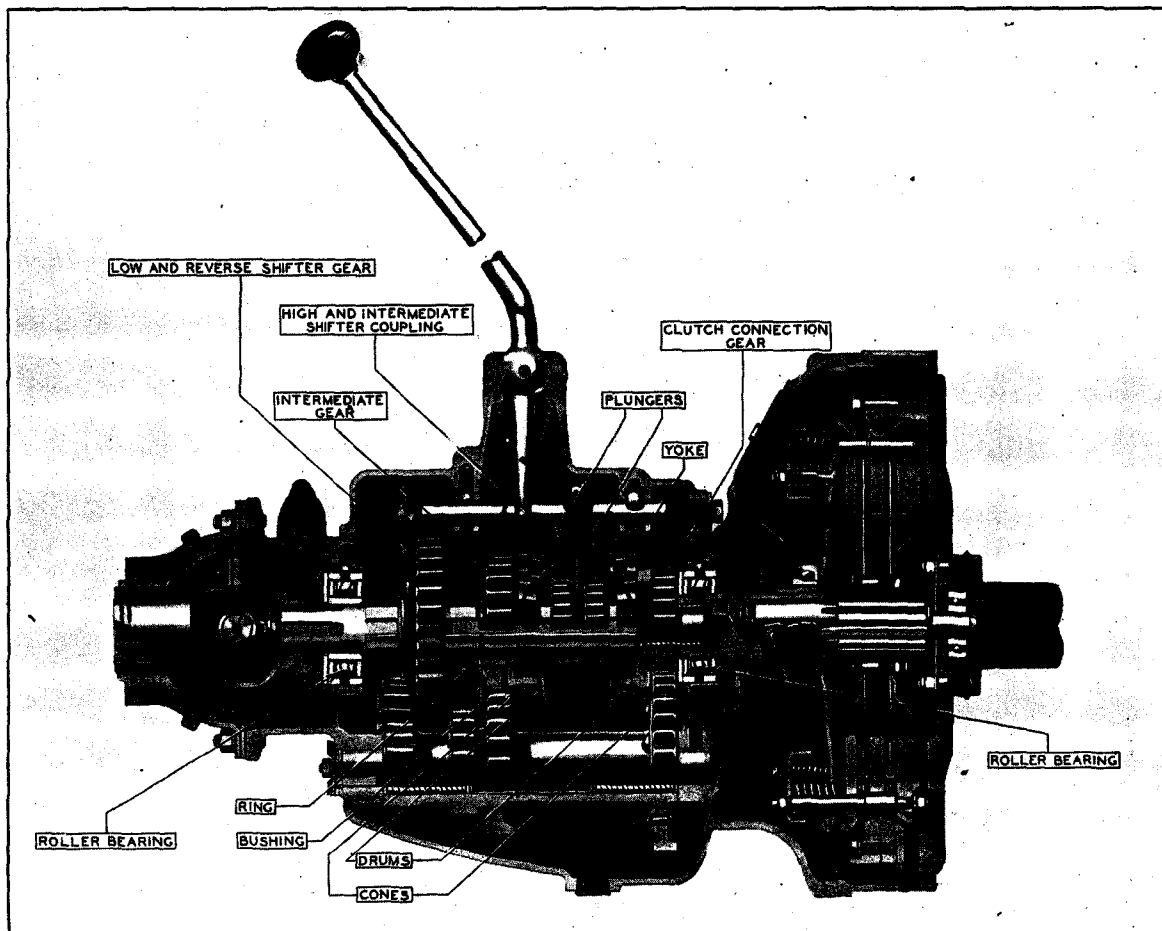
Sectional view of the new Synchro-mesh transmission used on both 341-B and 328 cars.
